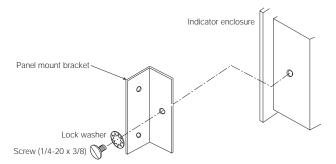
Attaching Panel Mount Brackets to the Enclosure
